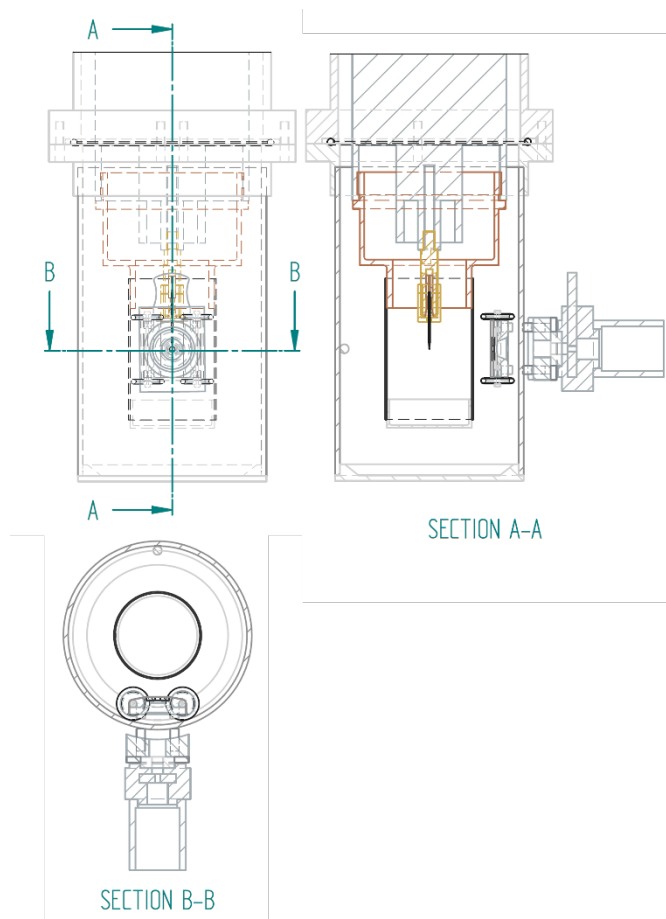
CAD drawing of the head of the Displex and new set-up along with two section views. Section A-A, perpendicular to the Displex and primary beam. Section B-B, parallel to the Displex and perpendicular to the primary beam.
